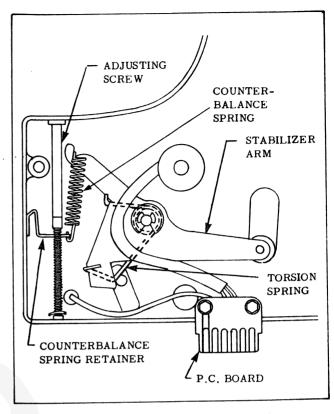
Figure AA. Arms and Counterbalance Spring Installed (Rear View)
